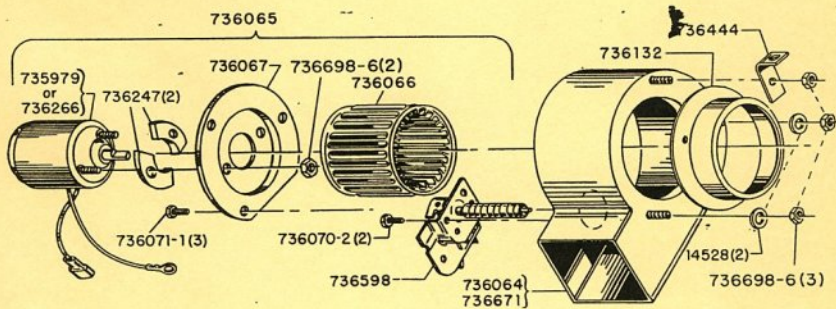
VENTILATING AIR BLOWER ASSEMBLY 736469-736672
